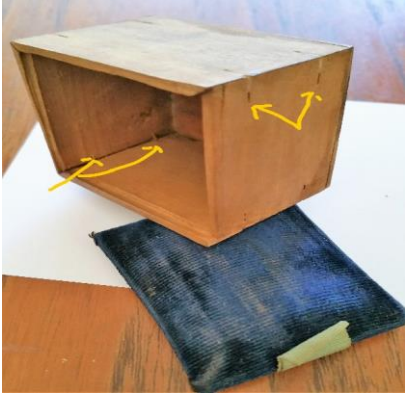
'Biscuits' are used to stabilize fine joints. Photo author's collection.
